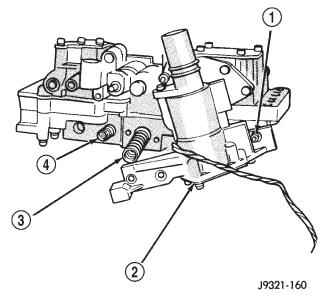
Converter Clutch And 3-4 Shift Valve Springs
